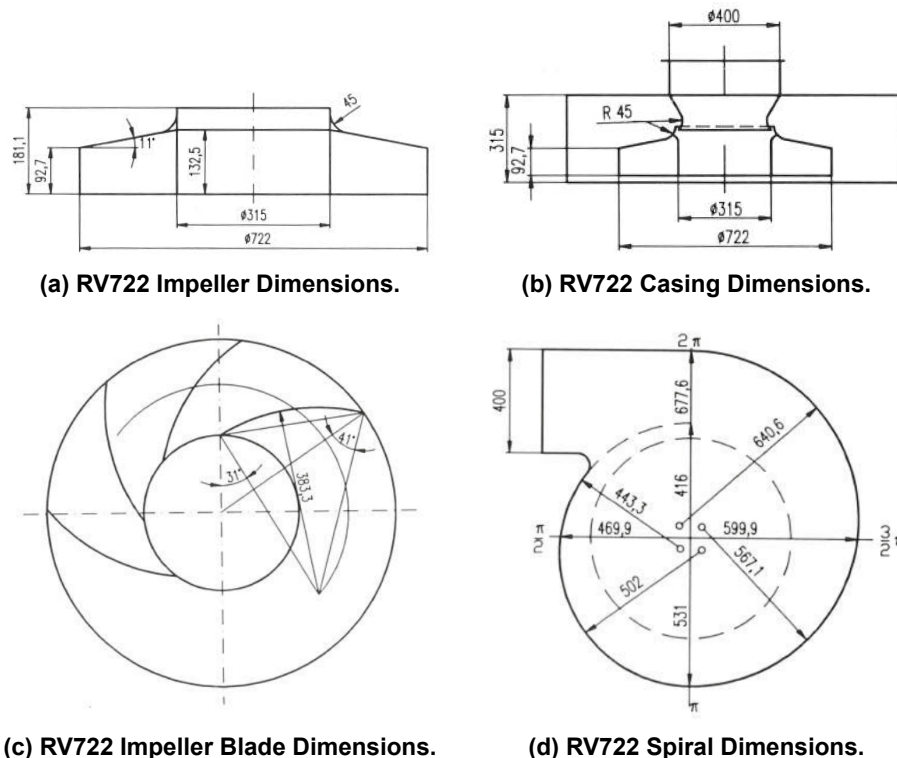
Dimensions for RV722 [10, Ch. 3.4, p. 128].
